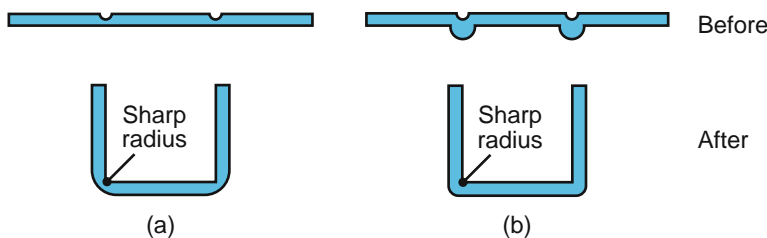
Application of (a) scoring or (b) embossing to obtain a sharp inner radius in bending. Unless properly designed, these features can lead to fracture. *Source:* Courtesy of Society of Manufacturing Engineers.
